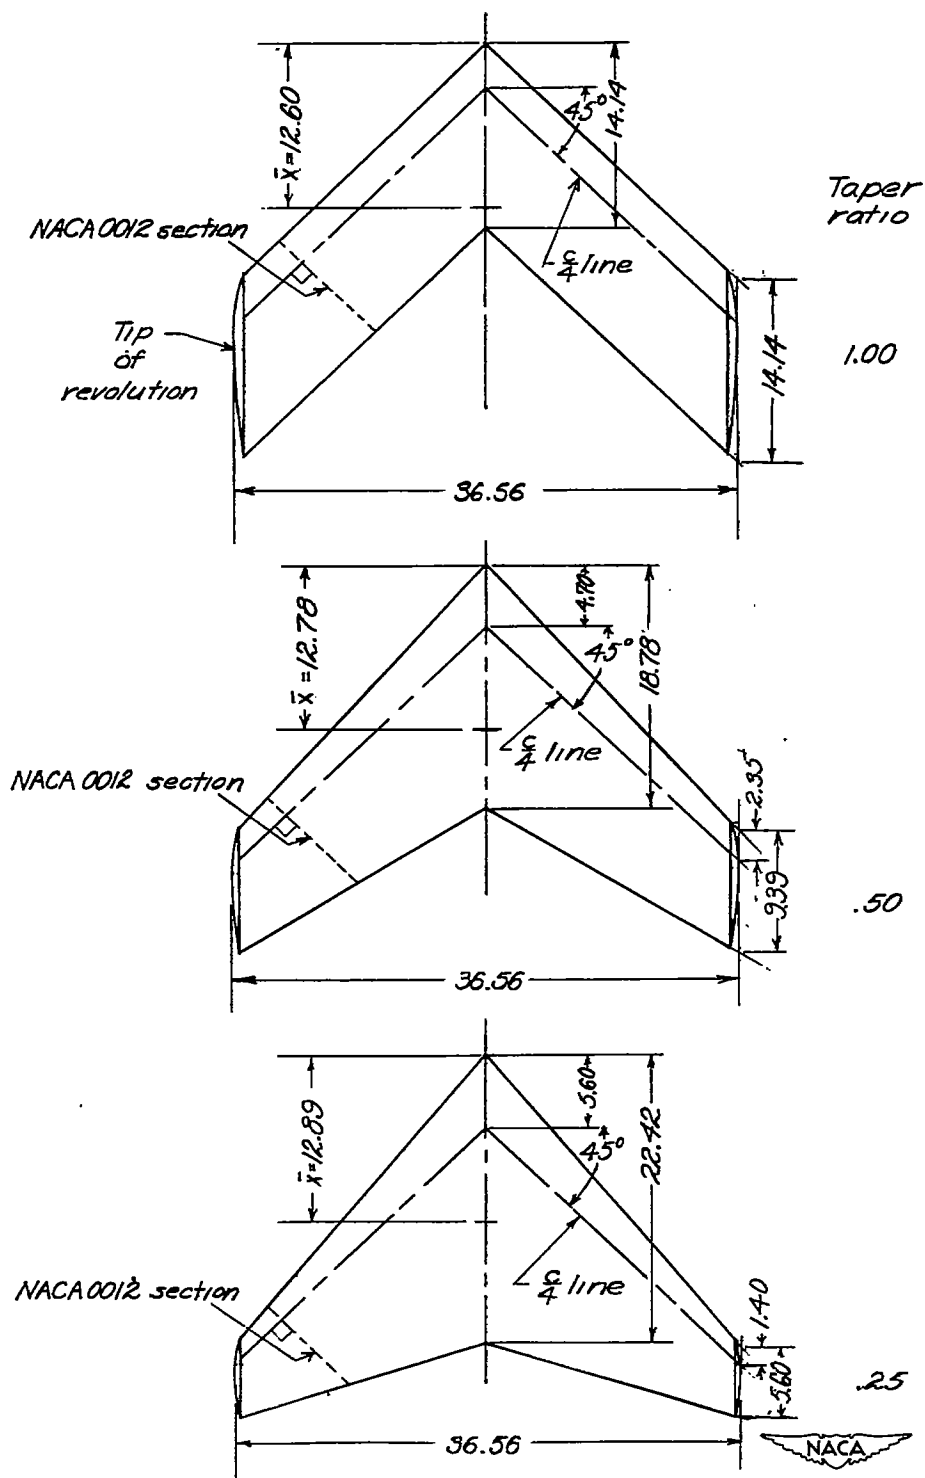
Plan forms and dimensions of tapered wings tested in Langley stability tunnel. (All dimensions are in inches.)
